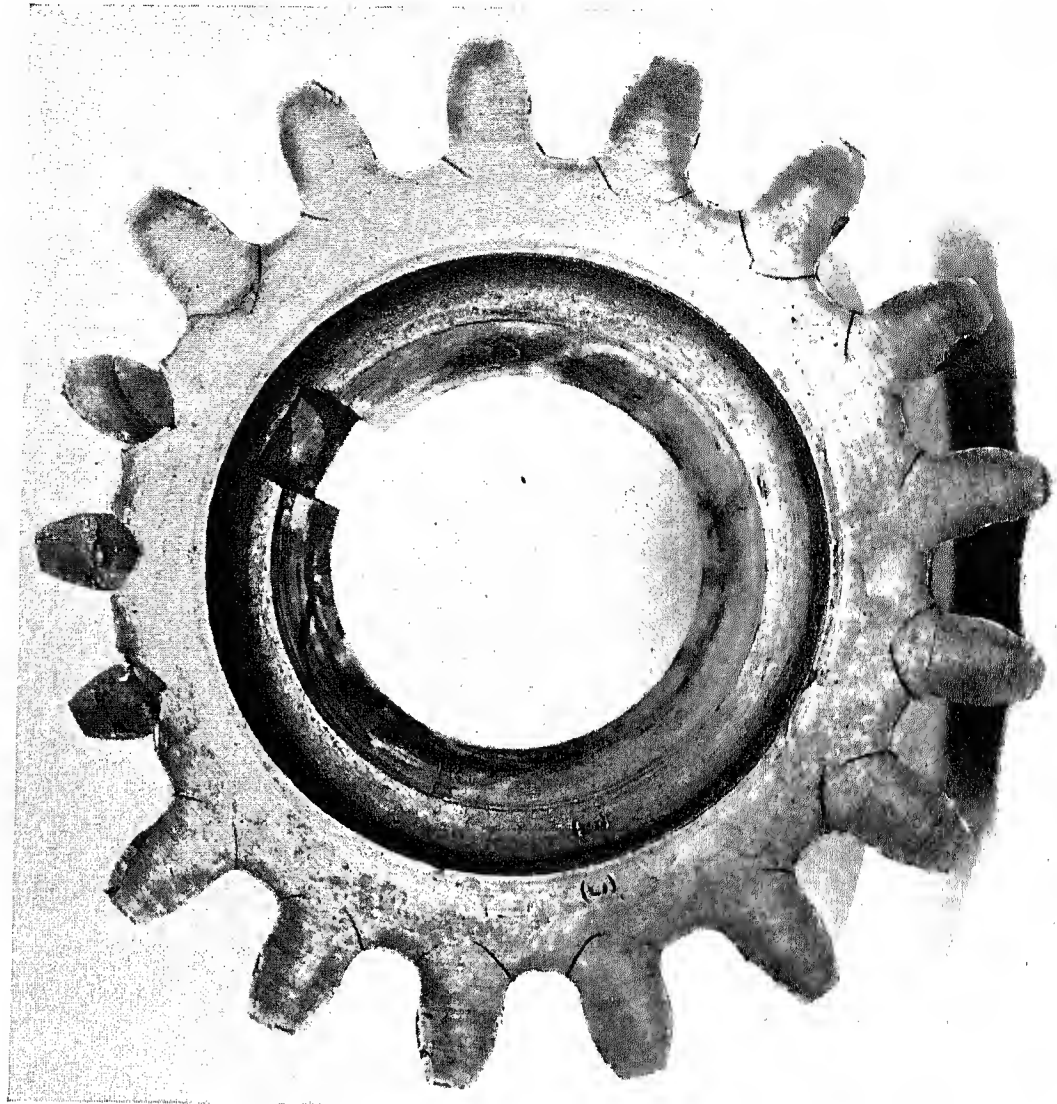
Fig. H.—Fatigue cracks on ends of traction pinion revealed by magnetic test.
